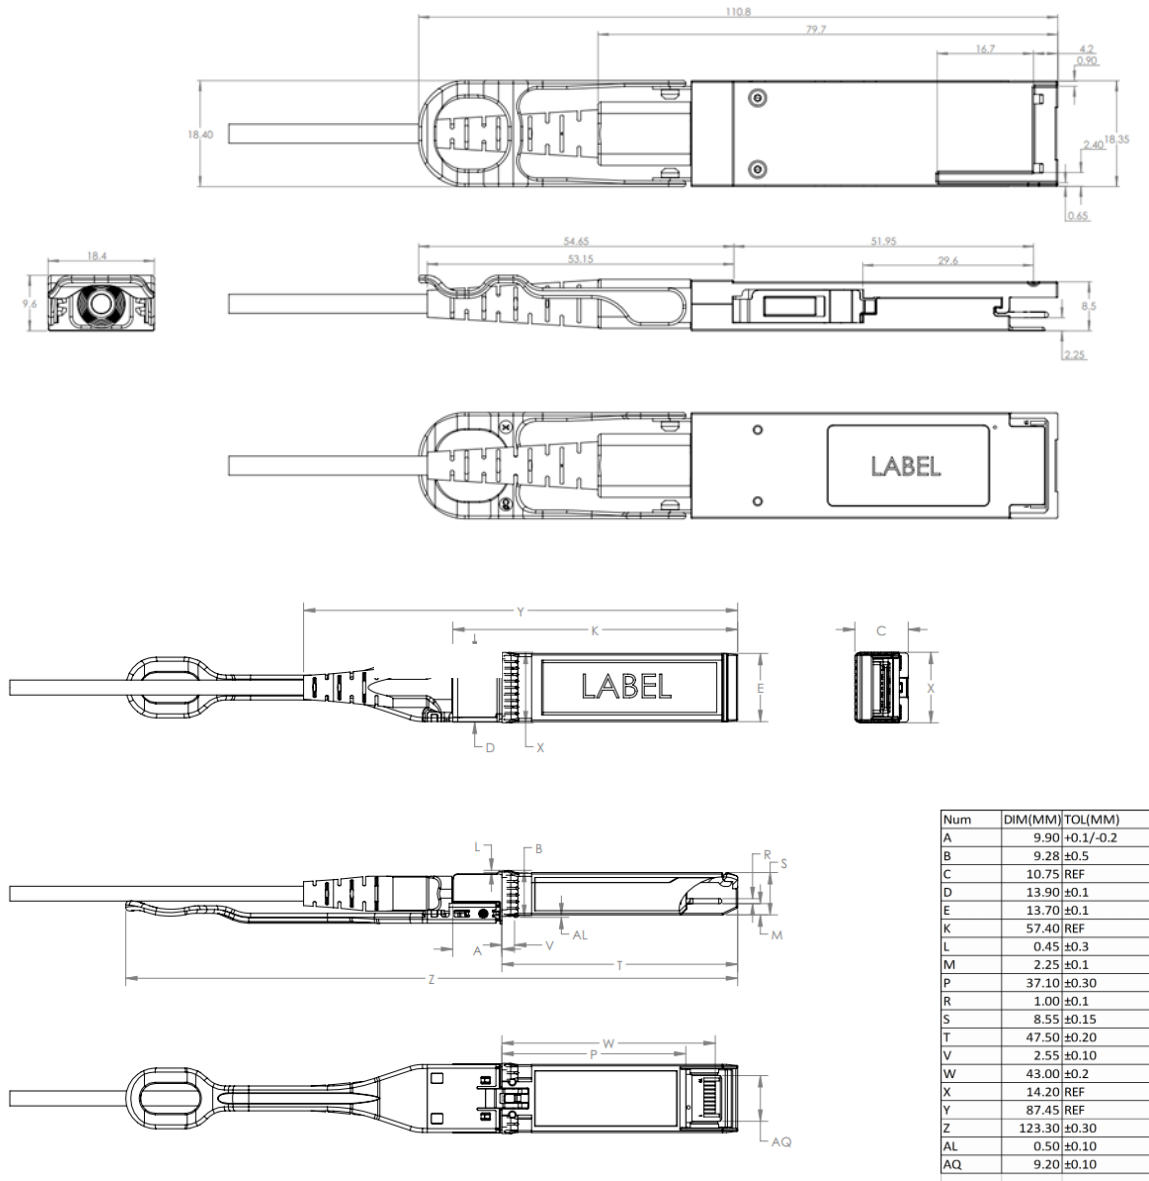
Mechanical drawing of Quadwire QSFP28 and SFP28 ends
